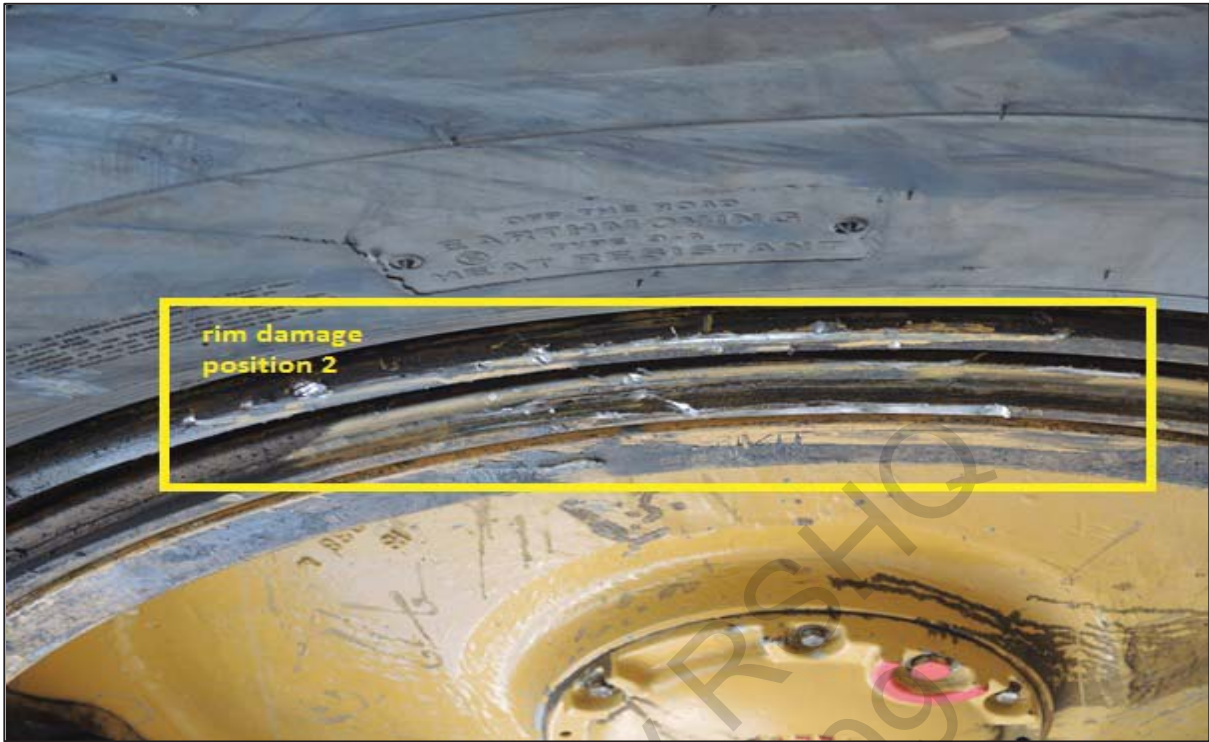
Damage to Position 2 assembly (from DNRM photos taken at incident scene).
